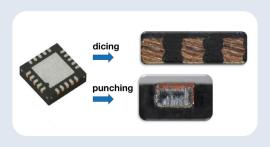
Singulated QFN after punching or dicing showing exposed base copper [54].
